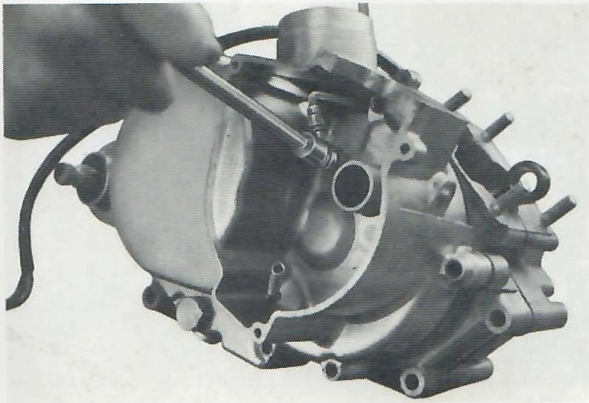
Unscrewing oil line union bolt with 8 mm wrench
